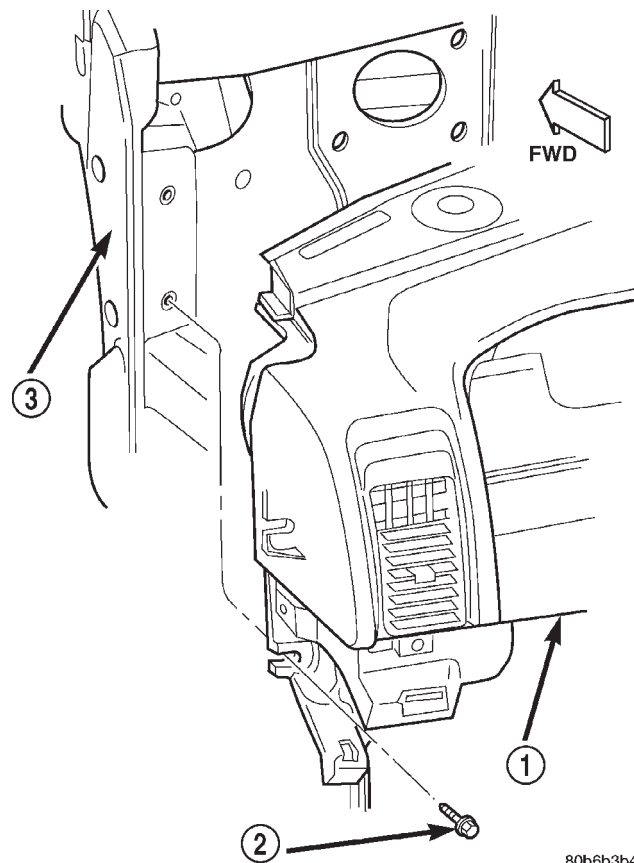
Instrument Panel to Driver Side Cowl Side Inner Panel Mounting
